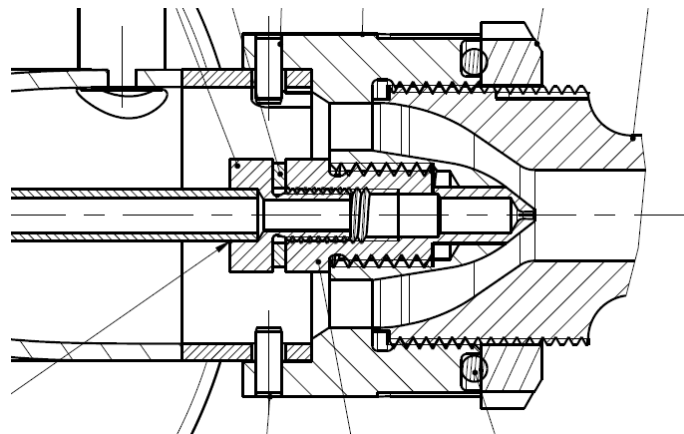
Construction drawing with Laval nozzle (Ejector development design A) [40]
